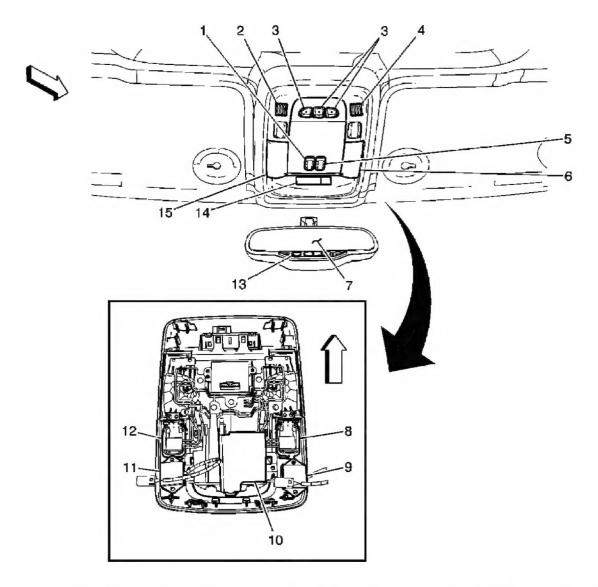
Identifying Overhead Console and Inside Rearview Mirror Components Courtesy of GENERAL MOTORS CORP.
